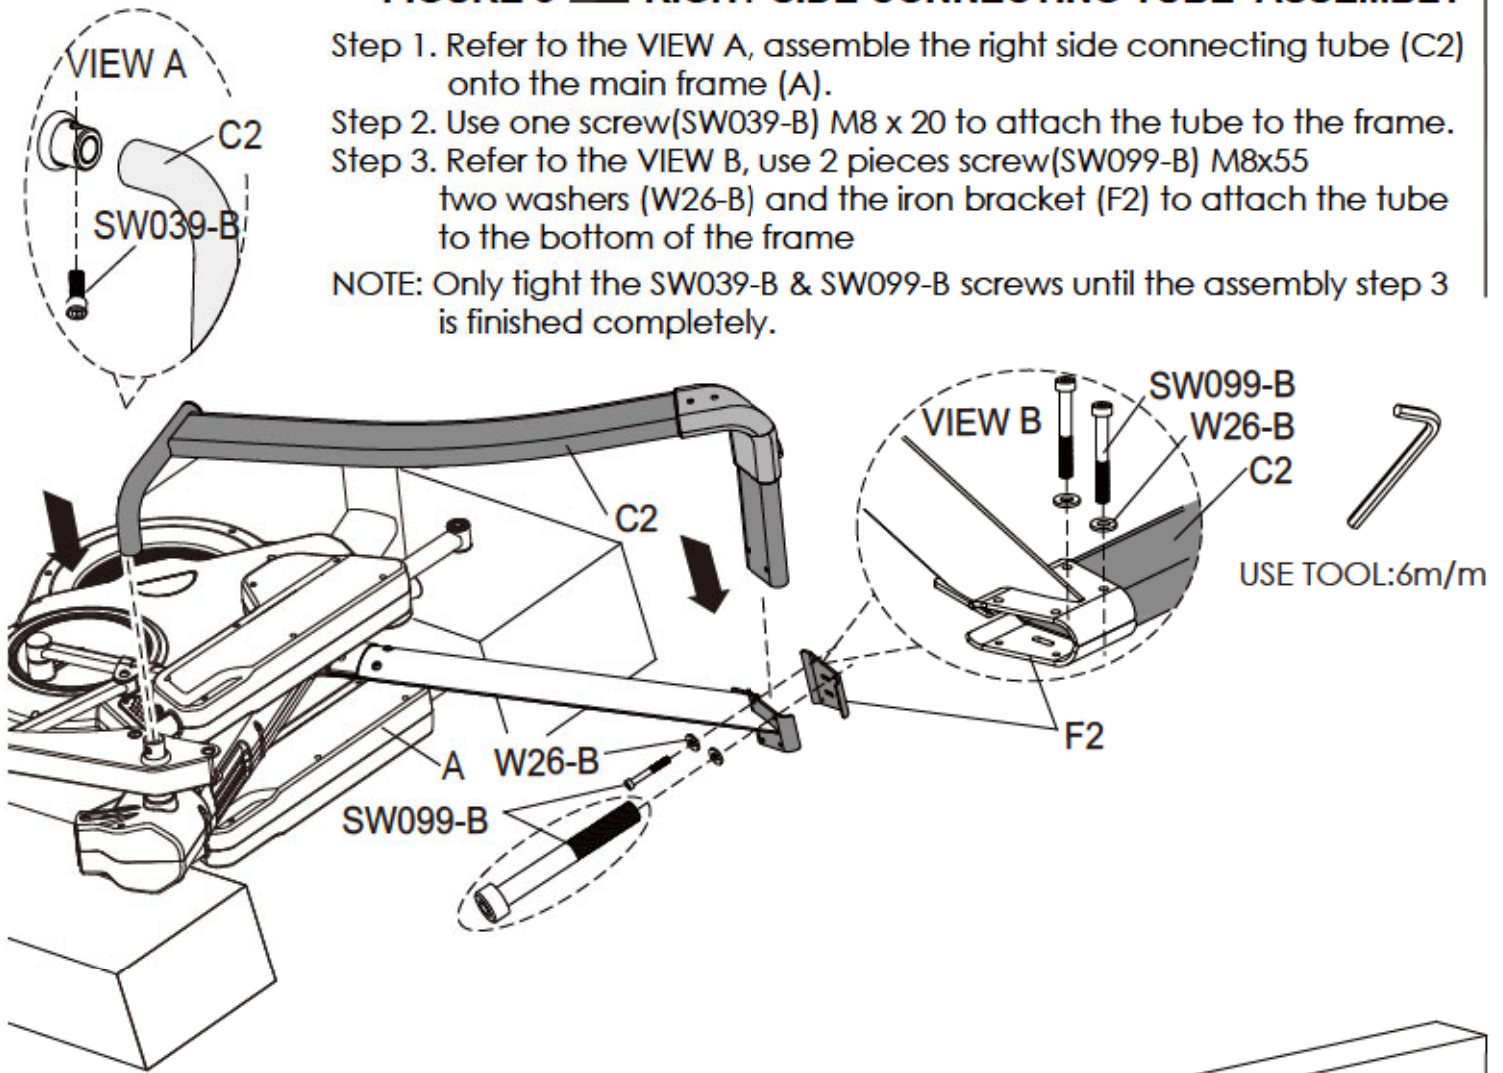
RIGHT SIDE CONNECTING TUBE ASSEMBLY
